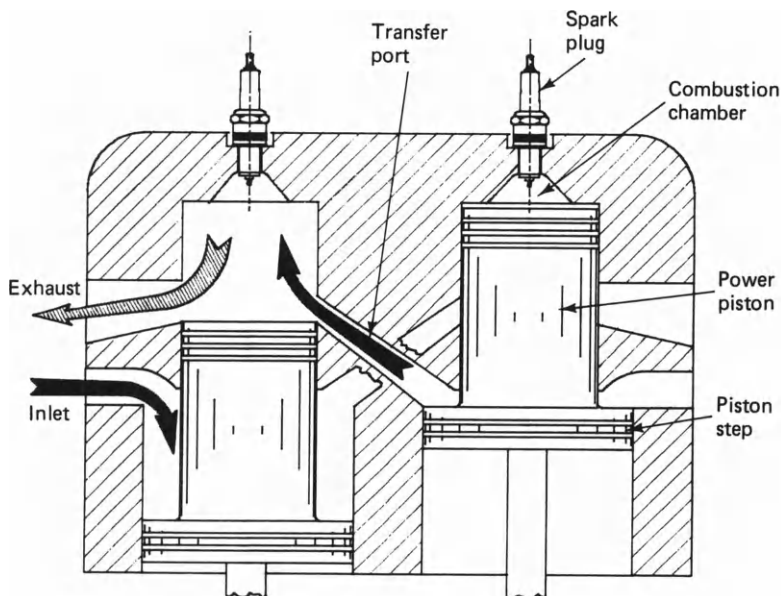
Cylinder and head of the Hooper stepped piston engine
